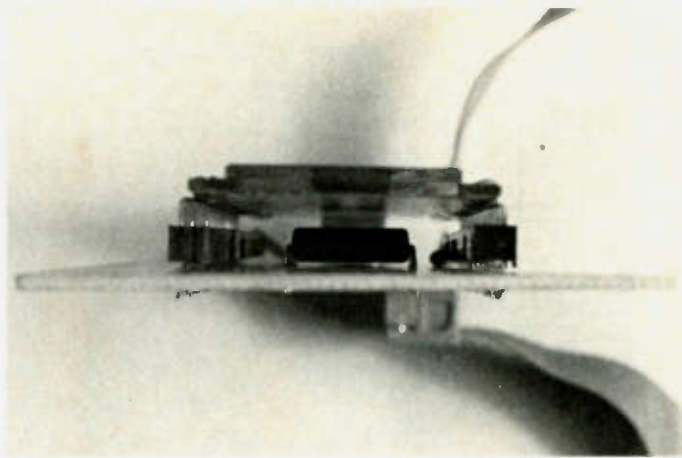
Component placement, display board. Driver chip fits under display unit, on the same side of the board. Display unit is elevated above the board by segments of high-profile IC sockets (see photos).
